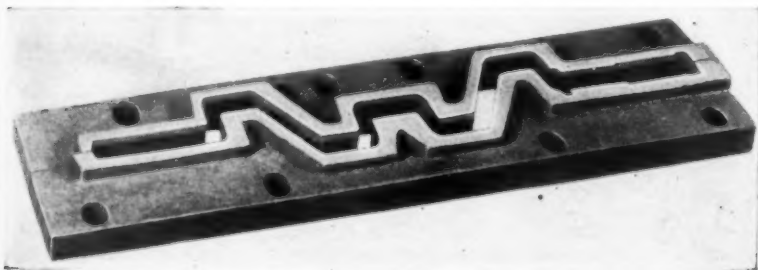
This die for hot-trimming crankshaft forgings has hard-facing alloy deposited in a groove similar to that sectioned in Fig. 6.
